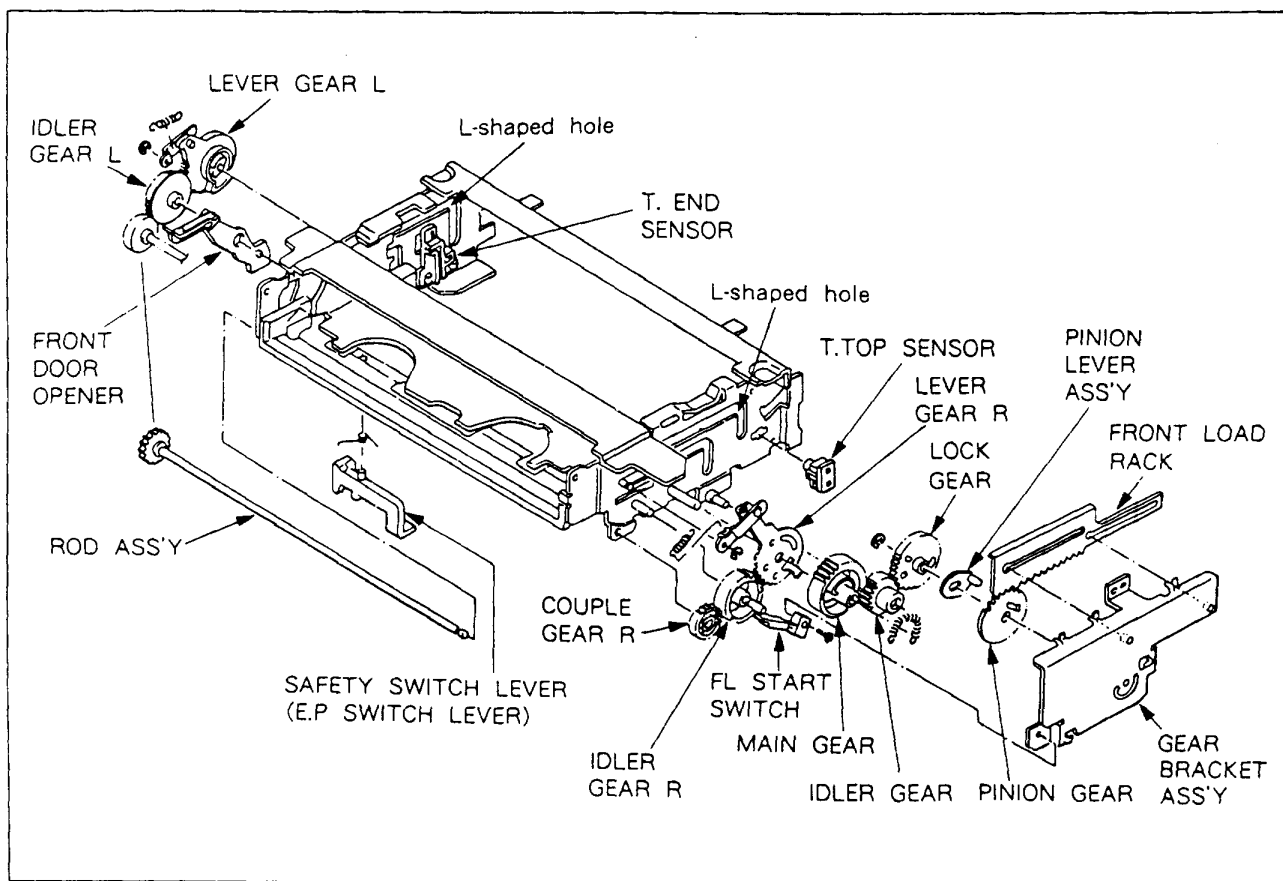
EXPLODED VIEW OF THE CASSETTE HOLDER MECHANISM
